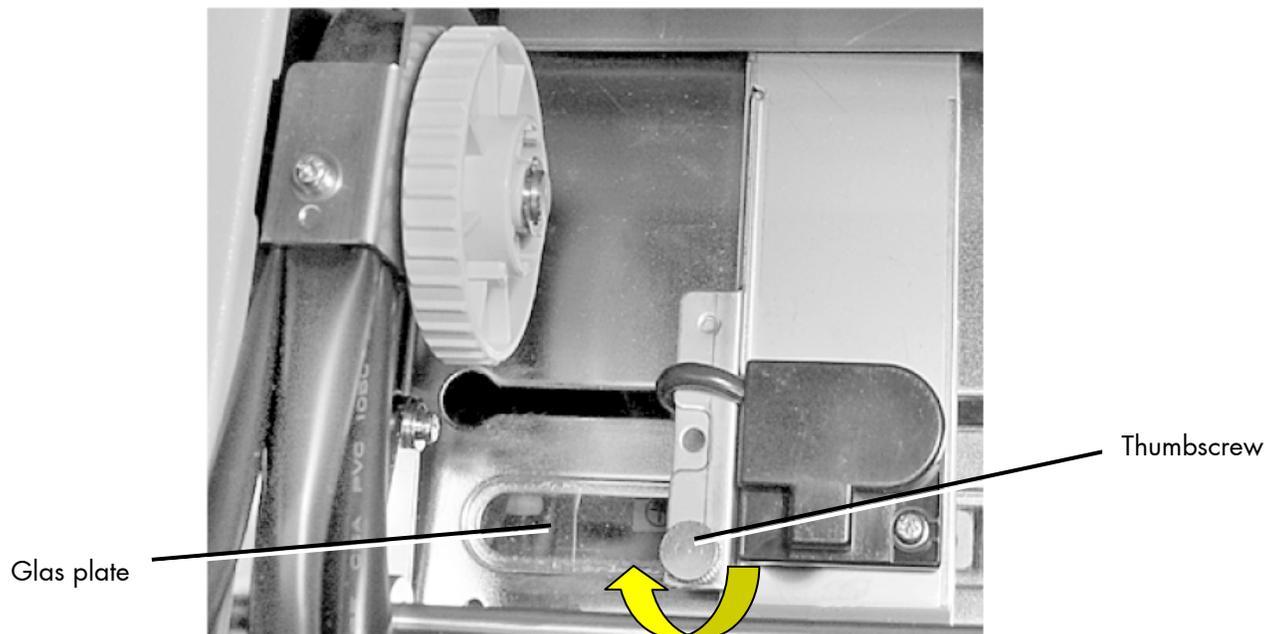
d Replacing and tightening the thumbscrew of the sensor assembly
